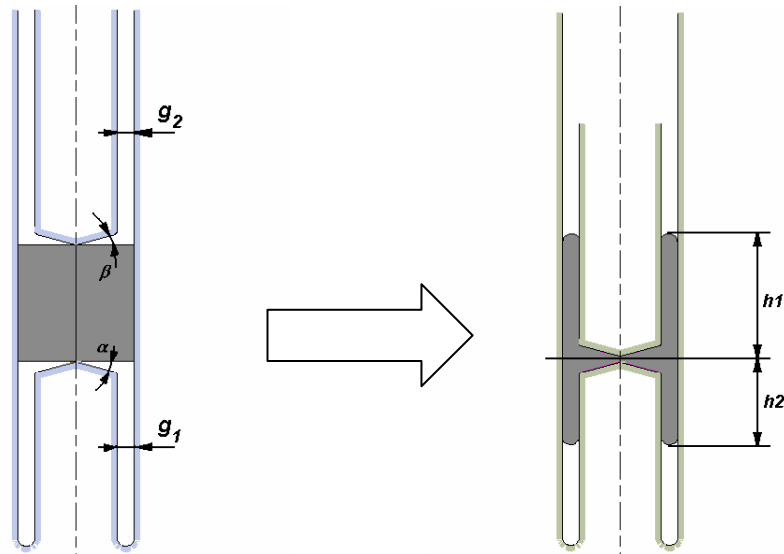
Schematic illustration of tools and the sample before (left) and after deformation (right)
